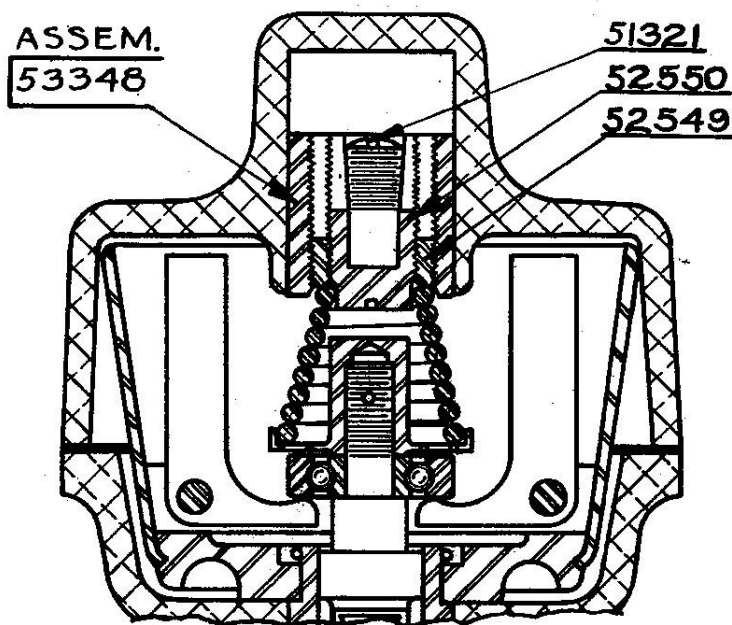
CONSTANT SPEED CONTROL RACK ASSEMBLY - (OLD MODEL)
